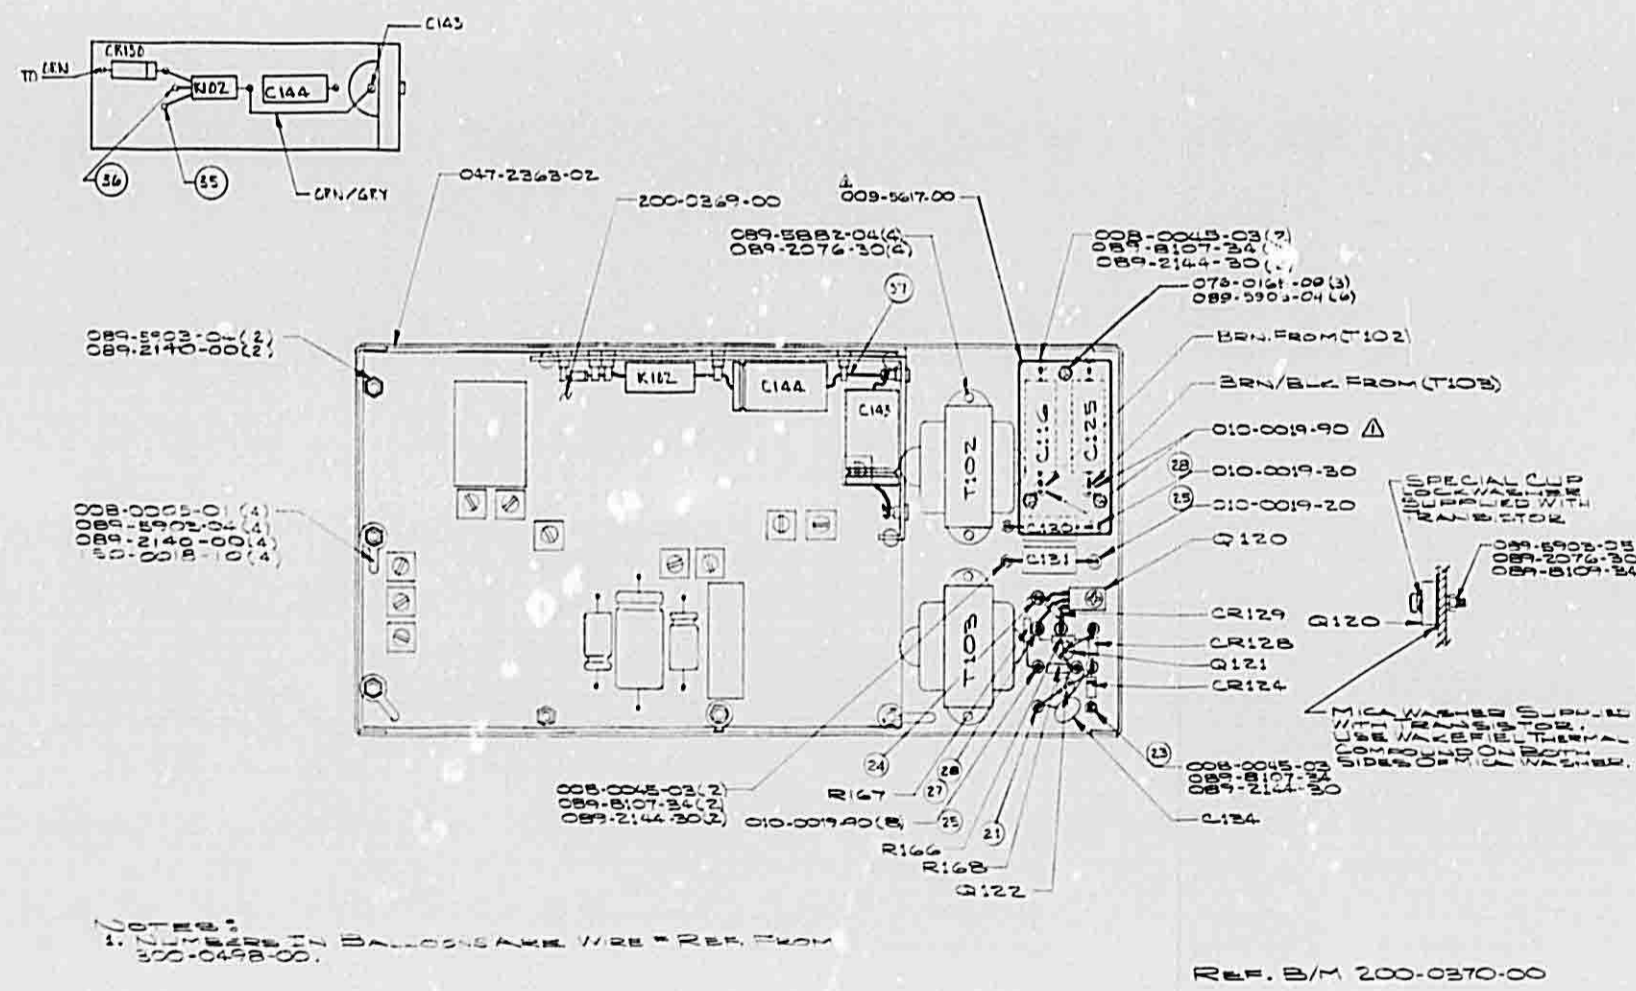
CONVERTER CHASSIS ASSEMBLY (300-0497-00 R-4)
